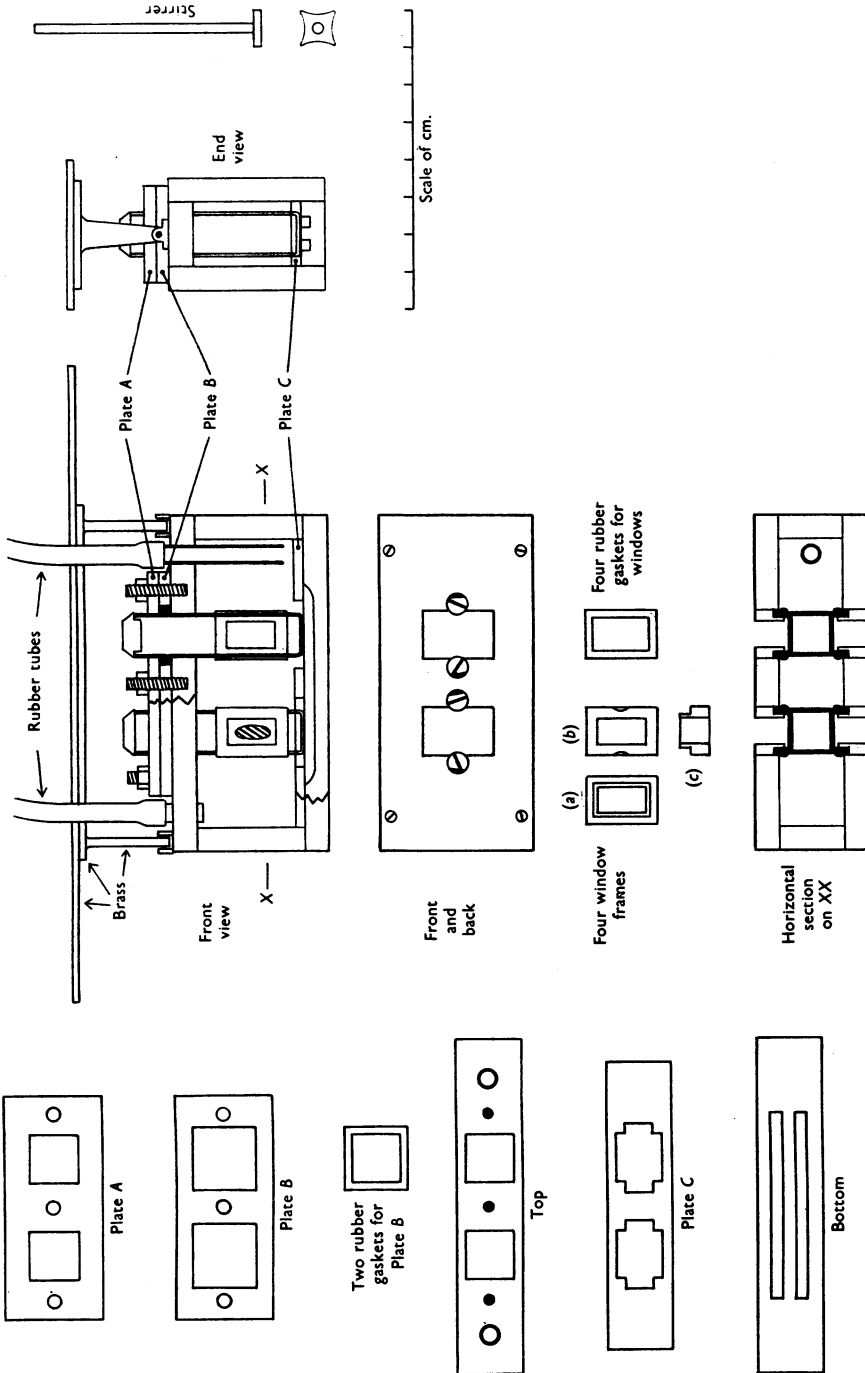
Working drawings of cell-holder and its parts (half actual size). *Front view* (shown partly in section): the shaded area shows the position of the widest part of the light beam; with the Beckman instrument used this was obtained with a distance of 6 cm. between the lower surface of the top brass lid and the upper surface of the bottom plate of the holder, but this should be checked with the instrument for which the holder is intended; the dimensions of the lid are 17 cm. x 4 cm. x $\frac{1}{8}$ in. The dimensions of the other parts are as follows. *Front and back plates*: 9 cm. x 41 mm. x $\frac{1}{4}$ in., with two rectangular holes 19 mm. x 13 mm. with centres 13 mm. from centre lines and lower sides 10.5 mm. from bottom edge of plate. *Four window frames* (a) back view, (b) front view, (c) horizontal section) 19 mm. x 13 mm. x $\frac{1}{8}$ in., pierced with holes 13 mm. x 7 mm. and with a 2 mm. x 3 mm. rebate cut round one face. *Four rubber gaskets* 19 mm. x 13 mm. with holes 15 mm. x 9 mm., cut from a $\frac{1}{8}$ in. sheet of soft rubber with smooth surface. *Plate A* 6 cm. x 26 mm. x $\frac{1}{8}$ in., with two holes 13 mm. square and three 4 BA clearance holes. (The centres of the square holes in plates A-C and the top are all at 13 mm. from the centre line, and the 4 BA holes in plates A and B and the top are spaced 25 mm. apart.) *Plate B* 6 cm. x 26 mm. x $\frac{1}{8}$ in., with two holes 17 mm. square and three 4 BA clearance holes. *Two rubber gaskets* 17 mm. square, with holes 13 mm. square, cut from $\frac{1}{8}$ in. sheet. *Top Plate* 9 cm. x 17.3 mm. x $\frac{1}{4}$ in., with two holes 13 mm. square and two holes to fit the Perspex tubes, and with three 4 BA brass studs tapped in. *Plate C* 77.3 mm. x 17.3 mm. x $\frac{3}{8}$ in., with two holes 13 mm. square with extensions as shown. *Bottom plate* 9 cm. x 17.3 mm. x $\frac{1}{4}$ in., with two grooves about $\frac{1}{8}$ in. x $\frac{1}{8}$ in. milled in upper surface. *Two end plates* (not shown) 28.3 mm. x 17.3 mm. x $\frac{1}{4}$ in.
